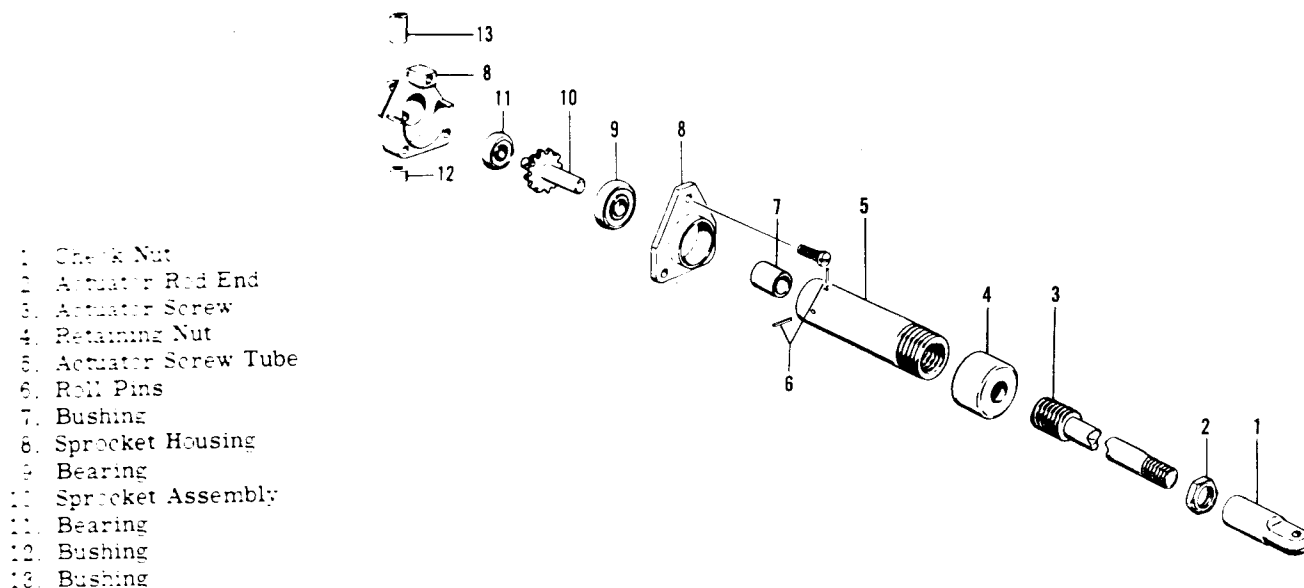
A. Rudder Trim Tab Actuator - Model 80
